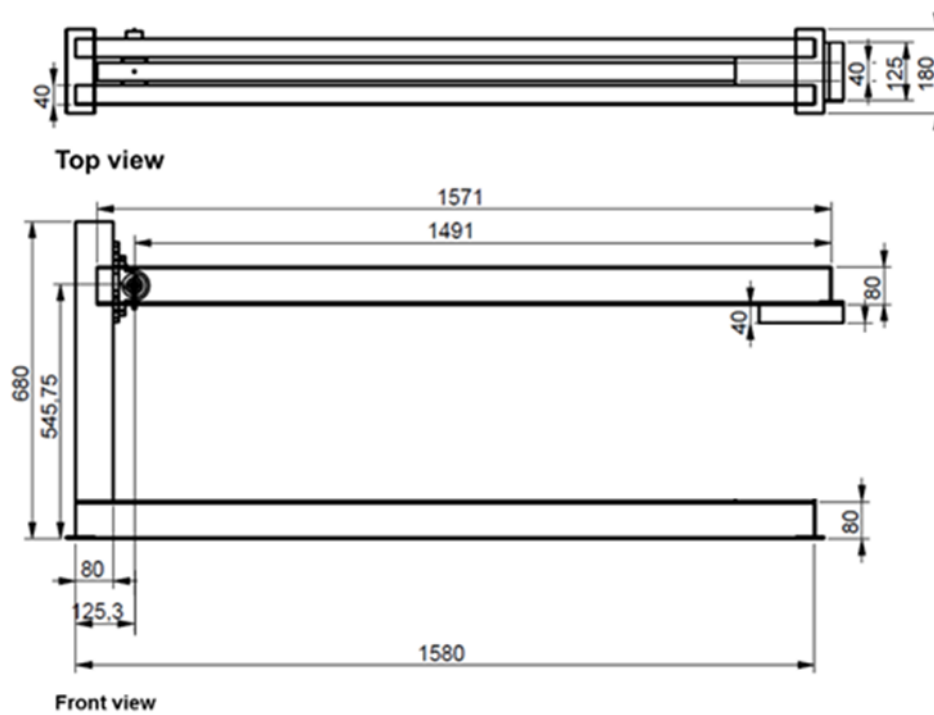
Dimensioned view of impact rig (all dimensions in mm)
